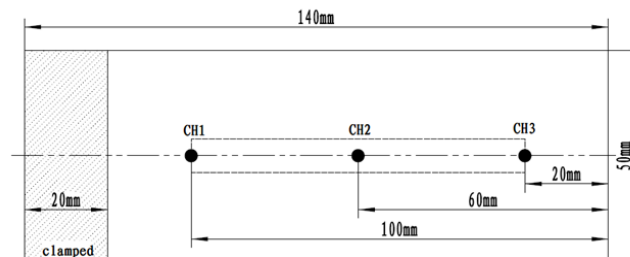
THERMOCOUPLES AT LOWER SURFACE
